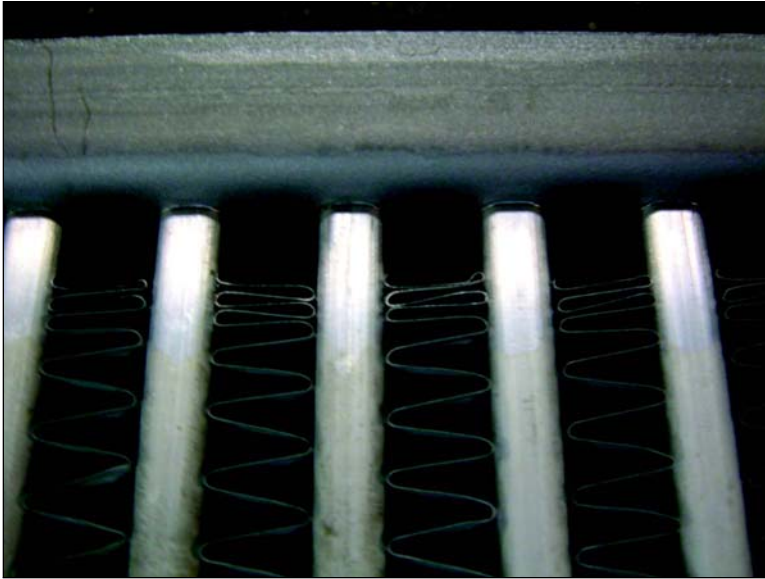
A Controlled Atmosphere Brazed (CAB) Aluminum Radiator Core with Mechanically Attached Nylon Tanks. This Heat Exchanger is Used on a Class 8 Truck.
